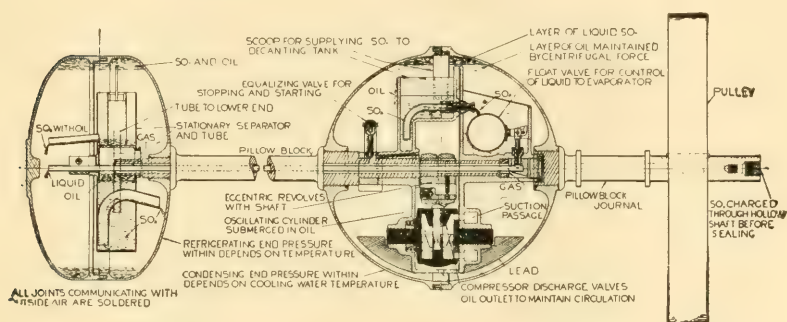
SECTIONAL VIEW OF AUDIFFREN HOUSEHOLD MACHINE.
